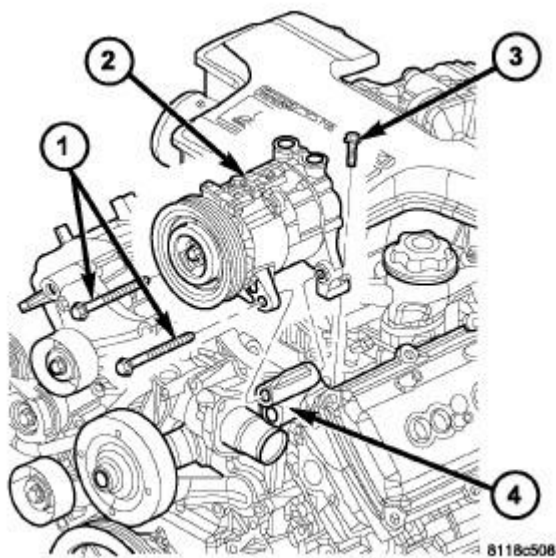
A/C COMPRESSOR - 5.7L ENGINE
